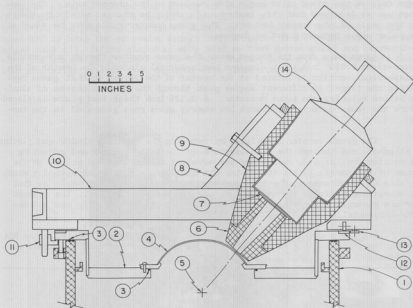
Cross sectional view of out-of-plane gamma-counter carriage and assembly.
